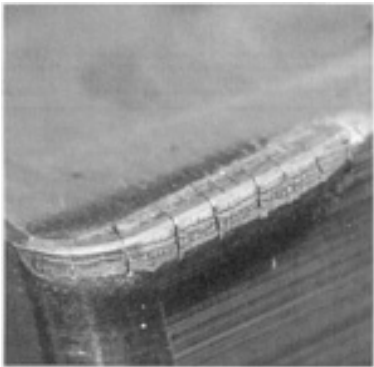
Built-up edge on a cemented carbide tool. The built-up edge was produced during the low-speed machining of a nickel-base alloy. 20×
